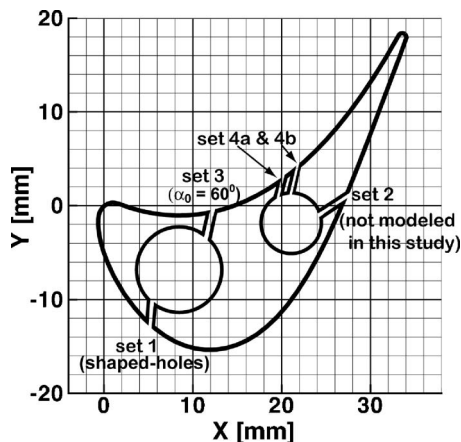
Geometrical dimensions of the film-cooled turbine blade [24,25]
